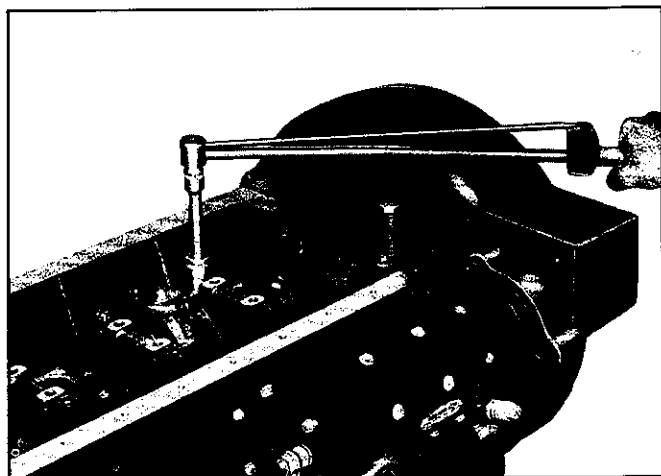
Using Torque Wrench, Tool J-1264, on a Model 71 G. M. Diesel Engine.
